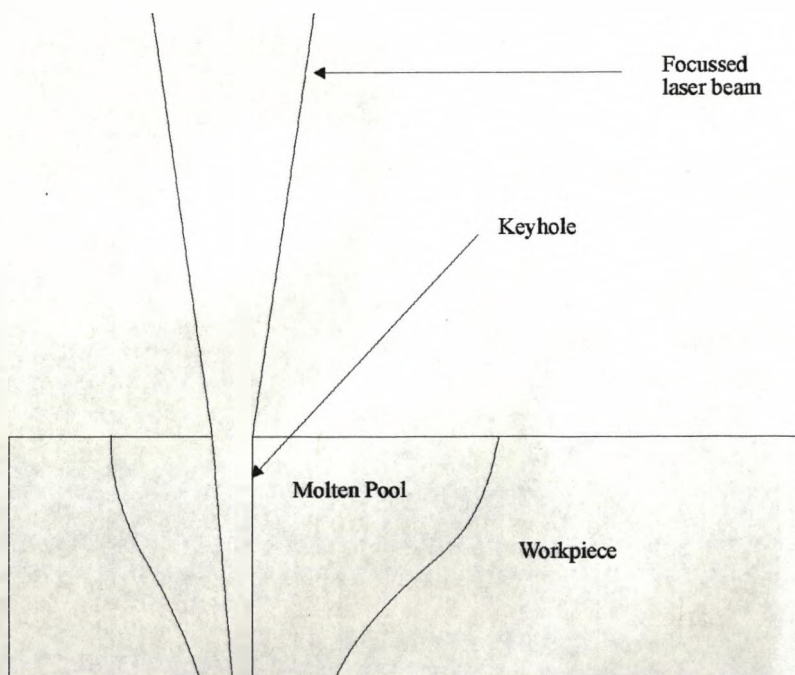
Schematic diagram of laser keyhole welding.
